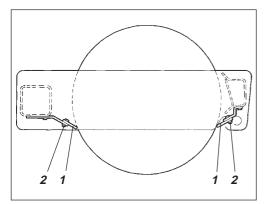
Scrapers 1. Scraper blade 2. Screws
